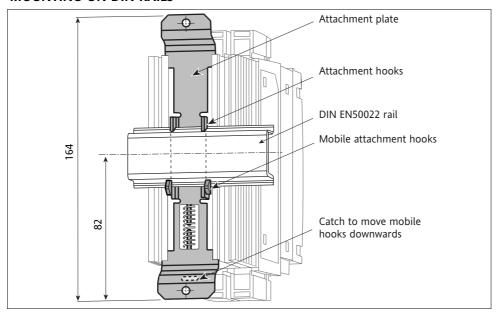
Attaching the 7100S solid state contactor to a DIN rail (16 A to 63 A, rear view)
